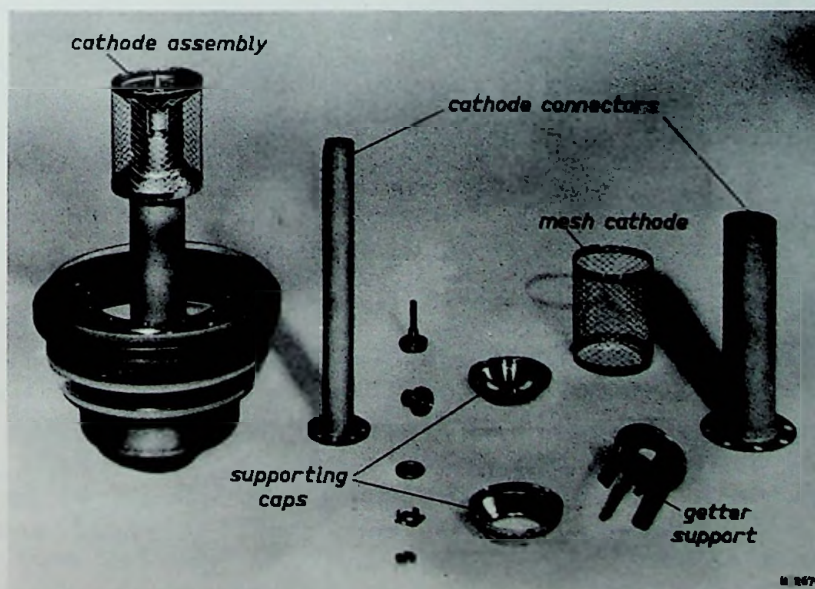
Cathode assembly of the TBL 6/20 (left) and component parts (right).
